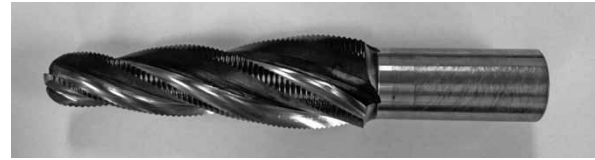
Tapered ball end mill made of high-speed steel for roughening
